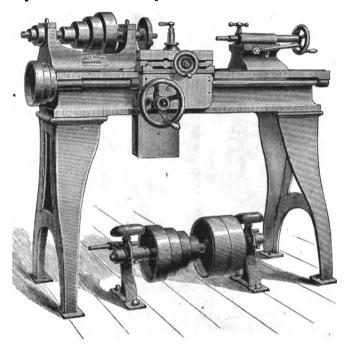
Thirteen-inch weighted-plain engine-lathe.
